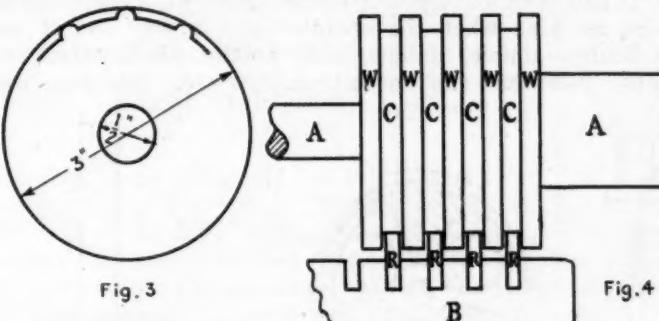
Profile of striking wheel of mechanical horn which was produced in a milling machine.
